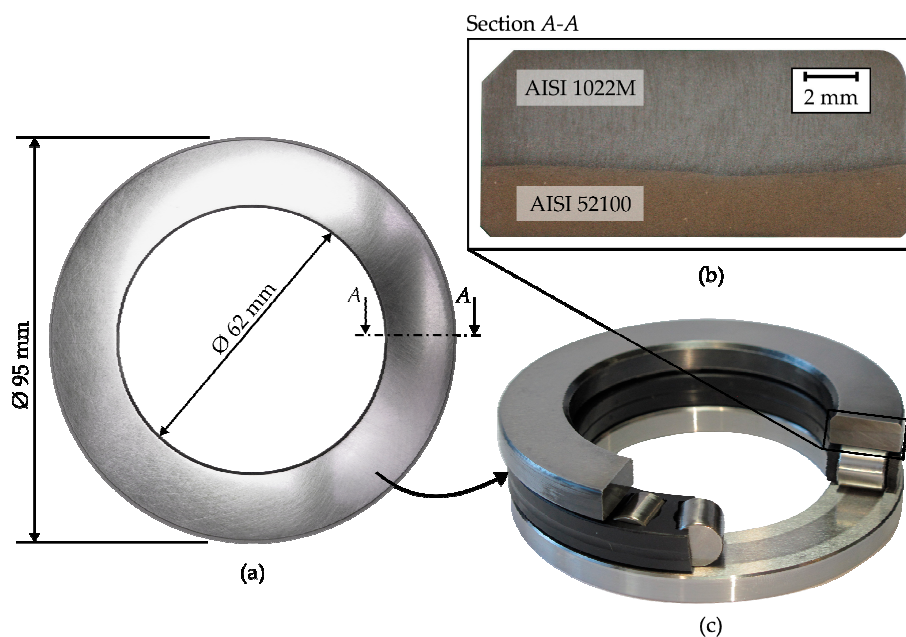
Tailored forming bearing: (a) finished specimen as roller bearing raceway; (b) sectional view; (c) cylindrical roller thrust bearing type 81212.
